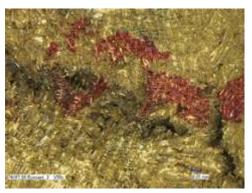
Enlarged view using microscope of the defect area inside the blind hole, showing a dendrite-like as-solidified surface.
